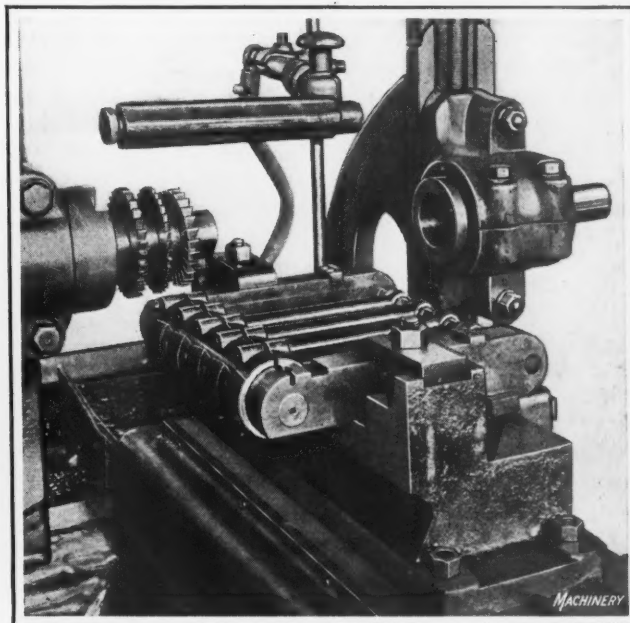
Close-up View of Work, Work-holding Fixture, and Milling Cutters on Machine shown in Fig. 3. Five Forgings are held at a Time
